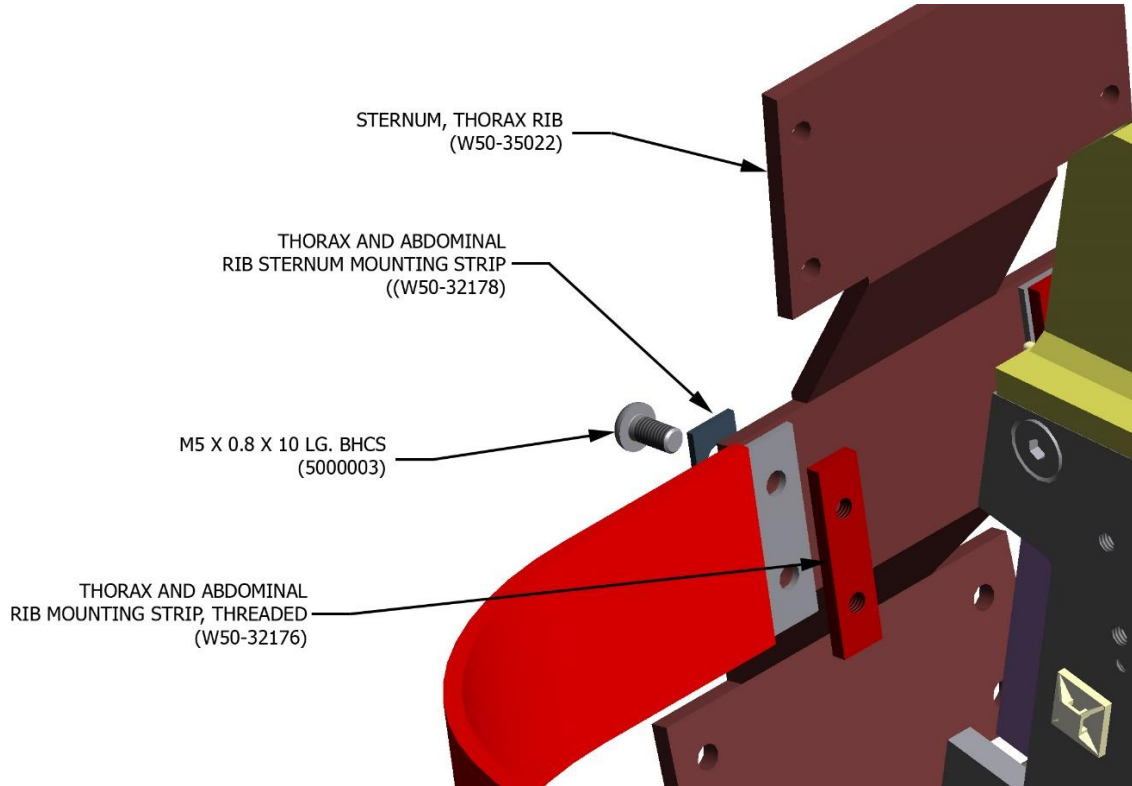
Removing the thorax and abdominal rib sternum mounting strip.
